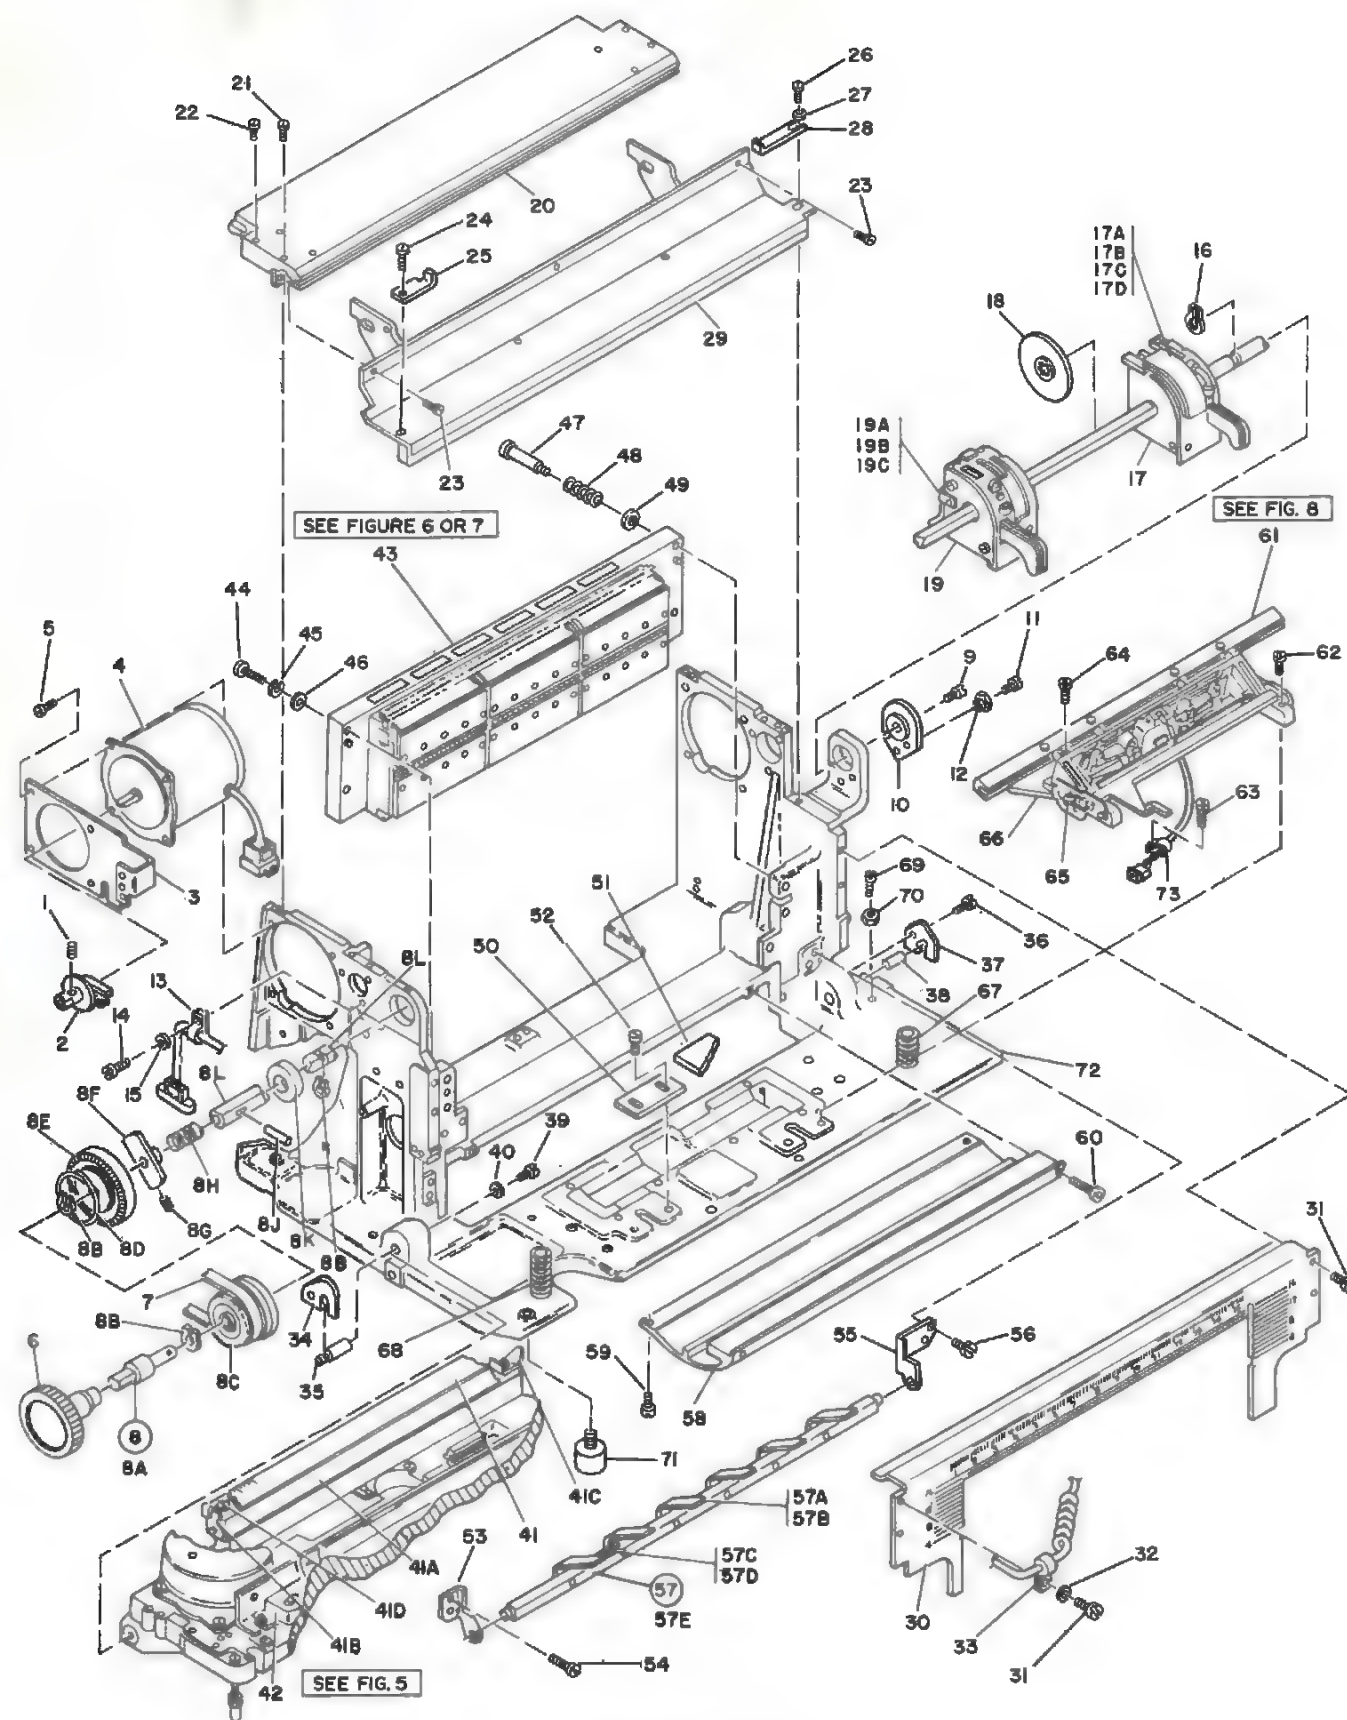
BASIC MECHANISM ASSEMBLY. SEE LIST 4.
